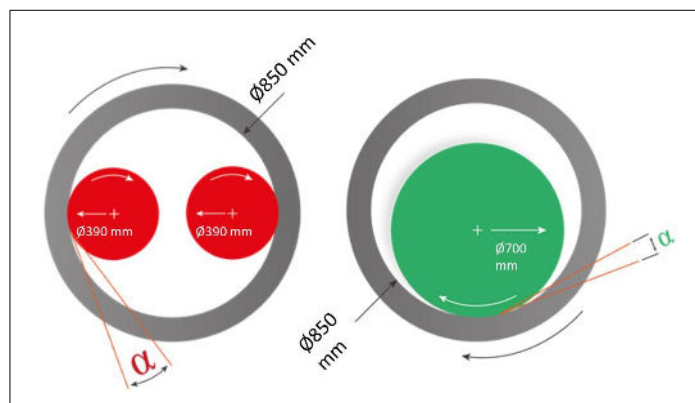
With MonoRoll technology, only one roller is used, which is twice the size of a 2-roller press.
